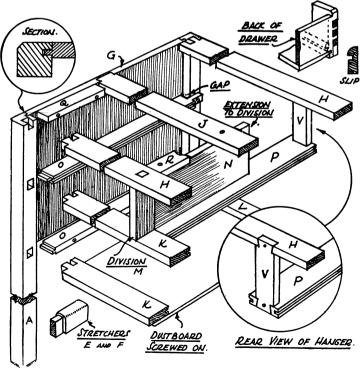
CUT-AWAY VIEW SHOWING THE VARIOUS JOINTS.
